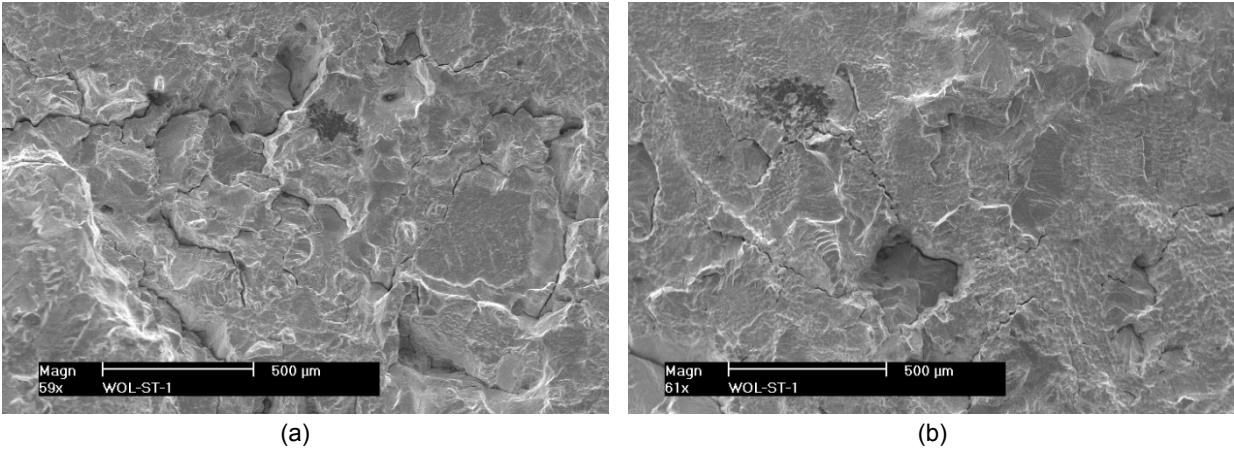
Fracture surface of specimen WOL-ST-1 at (a) location 4, and (b) location 5 in Fig. 3-35. Crack advance is from bottom to top.
